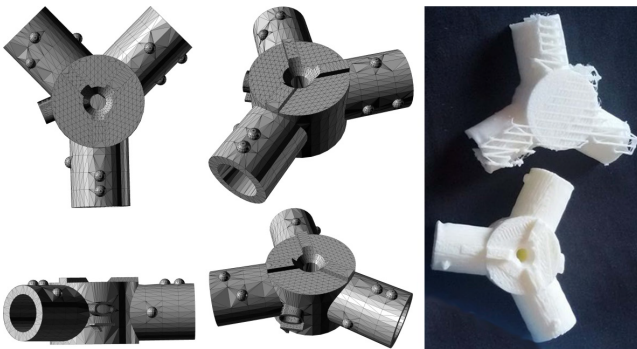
Three dimensional views of joint no. 10 and the printed ones.
